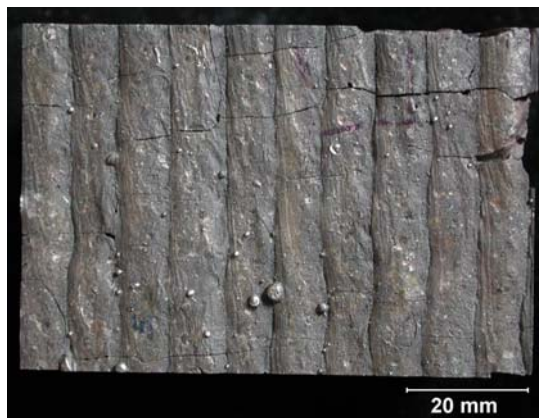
[6]. Surface of CN–O padding weld before service (coal pulverizer). Large cracks resulting from cooling after pad welding. This is characteristic of the work without dynamic loads. Hardness at surface:  $64 \pm 2$  HRC; thickness: 23 mm. This padding weld has survived 14500 working hours in the coal pulverizer
